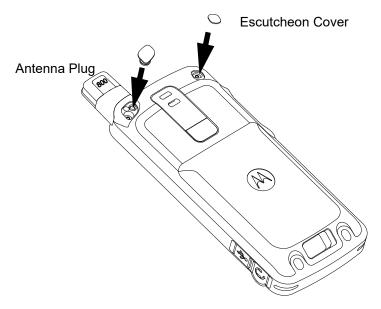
Antenna plug and screw plug re-assembly for 800 MHz
